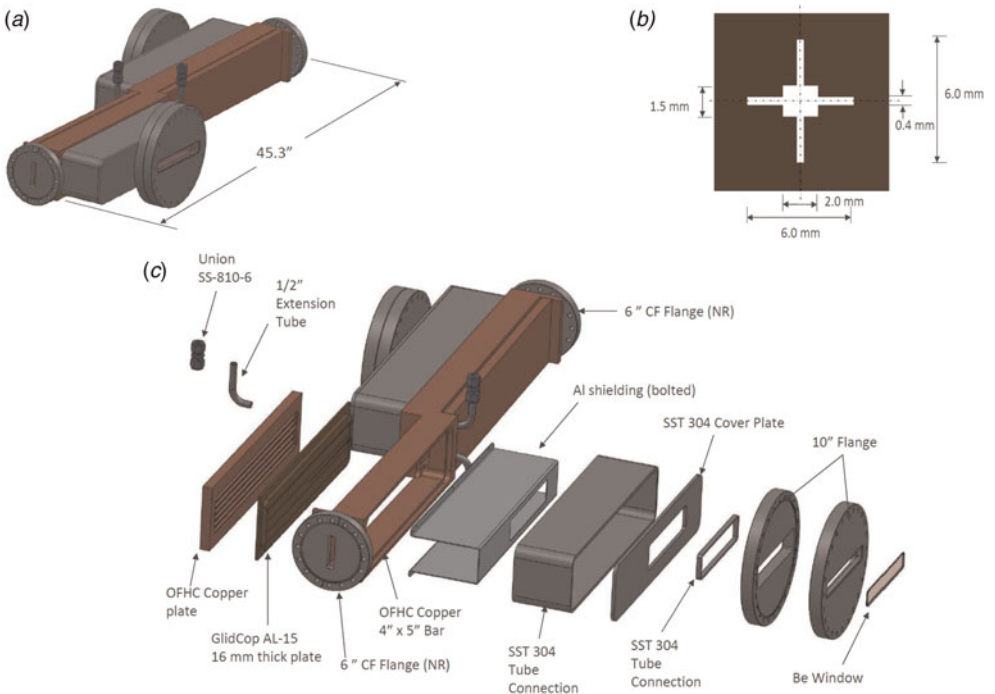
Overall dimension (a), exit aperture detail (b) and exploded view (c) of the GRID-XBPM.
